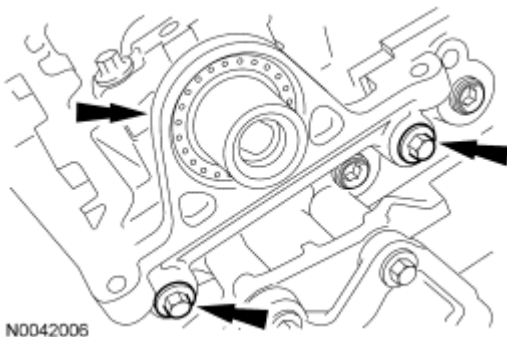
Locating Camshaft Oil Seal Retainer And Bolts
